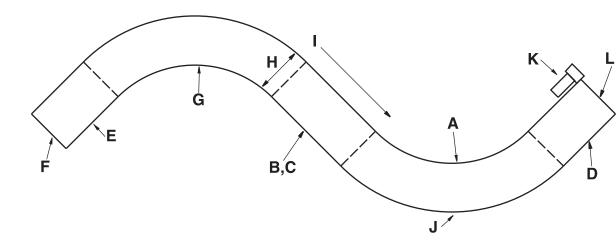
TYPICAL 2-TURN RADIUS LAYOUT
